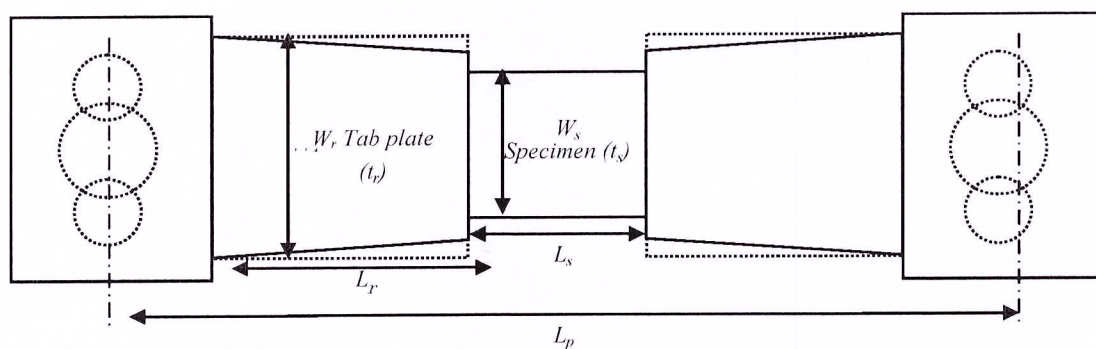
Conceptual view of test specimen, tab and load jig
